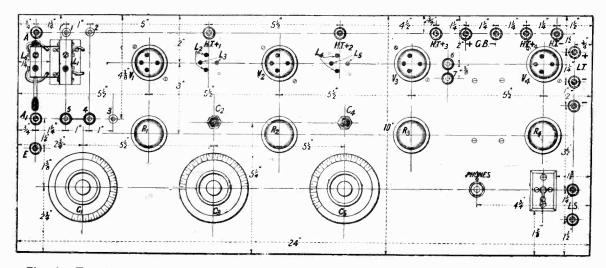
The front of panel drilling diagram should be consulted in setting out the panel. Blue Print No. 84A.
